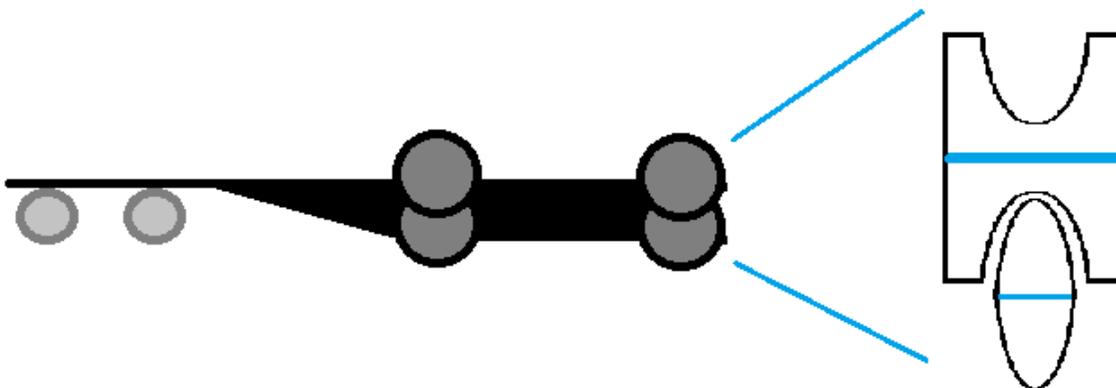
Forming of the rim well. The heated plate is fed through a series of rollers, which are seen on the right, to form the U-shape of the rim well.
